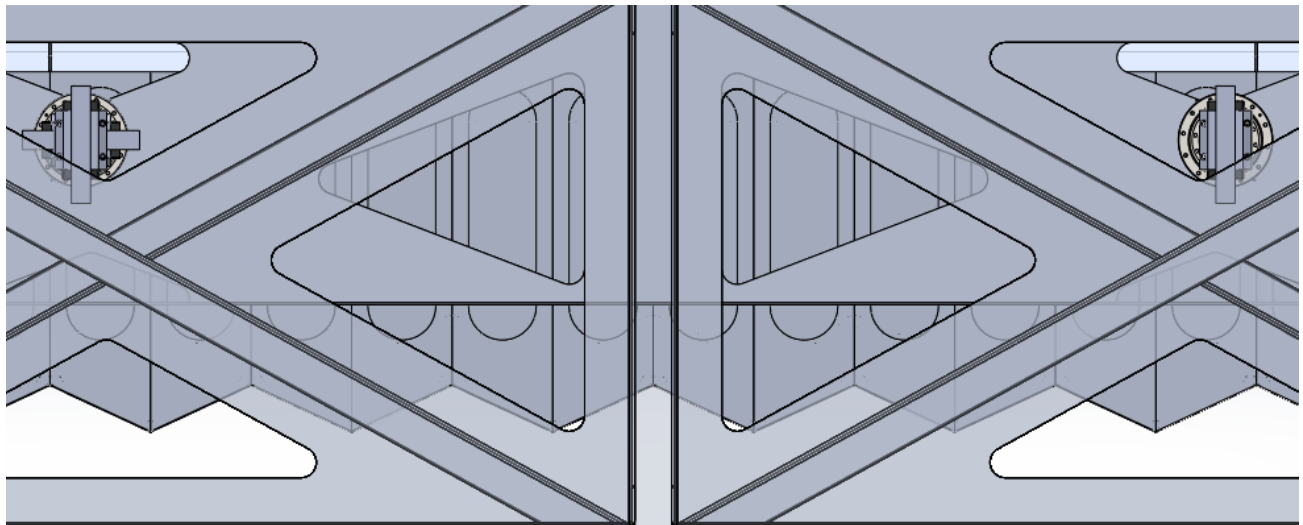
Left- and Right-Hand Guide Rail Assemblies
